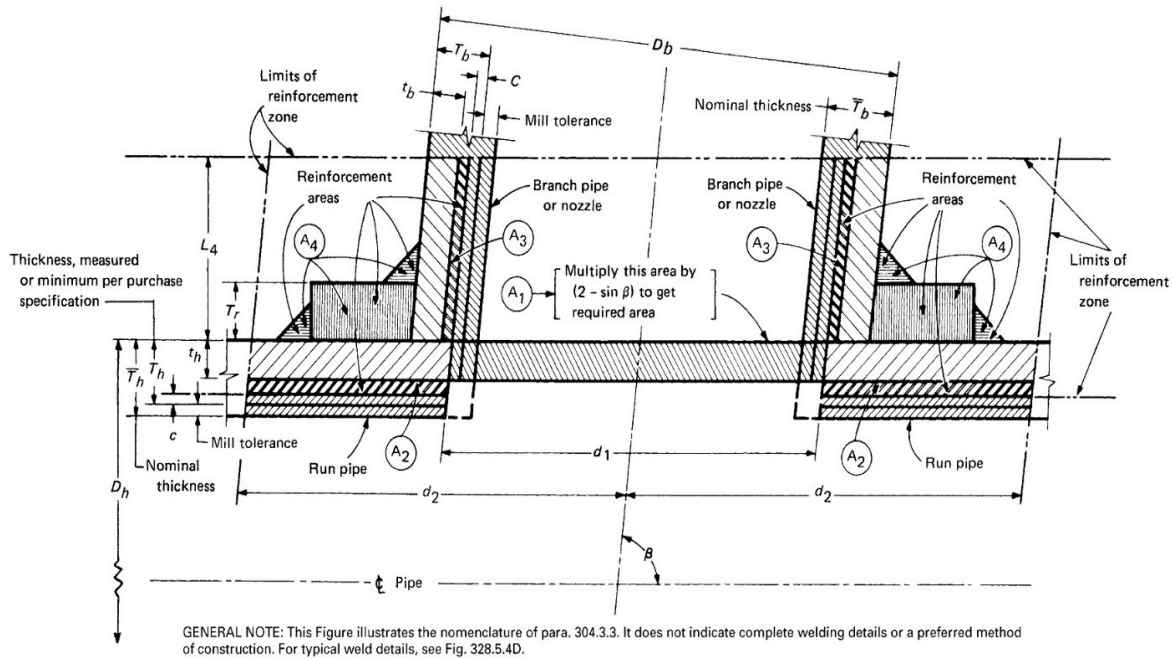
Branch connection reinforcement (ASME, 2002)
